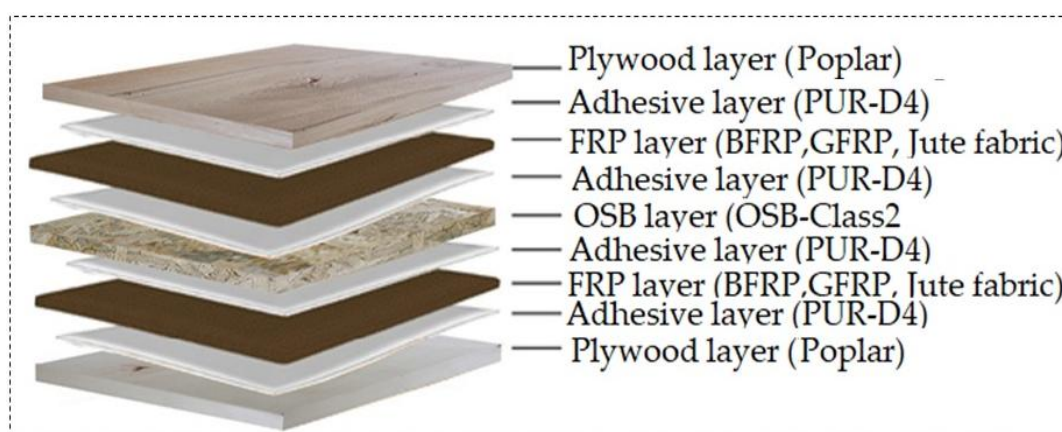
Exploded view of a multi-layered wood-based sandwich panels structure.
